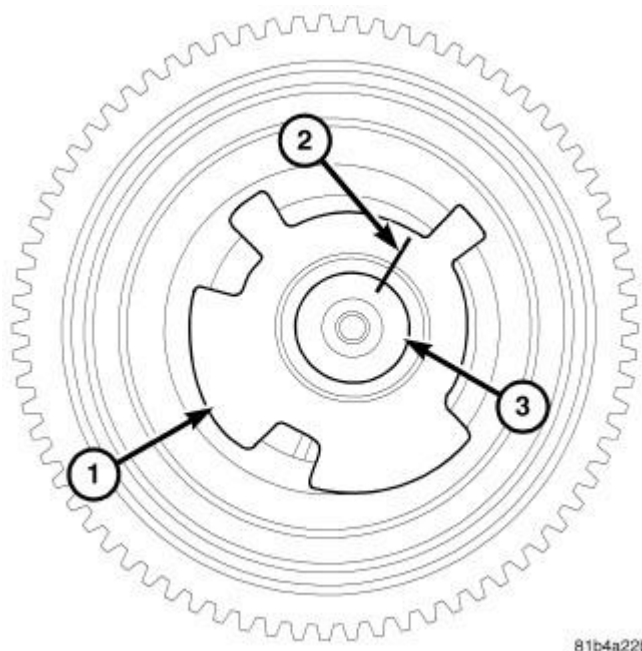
Marking CMP Sensor Reluctor Wheel & Exhaust Camshaft
